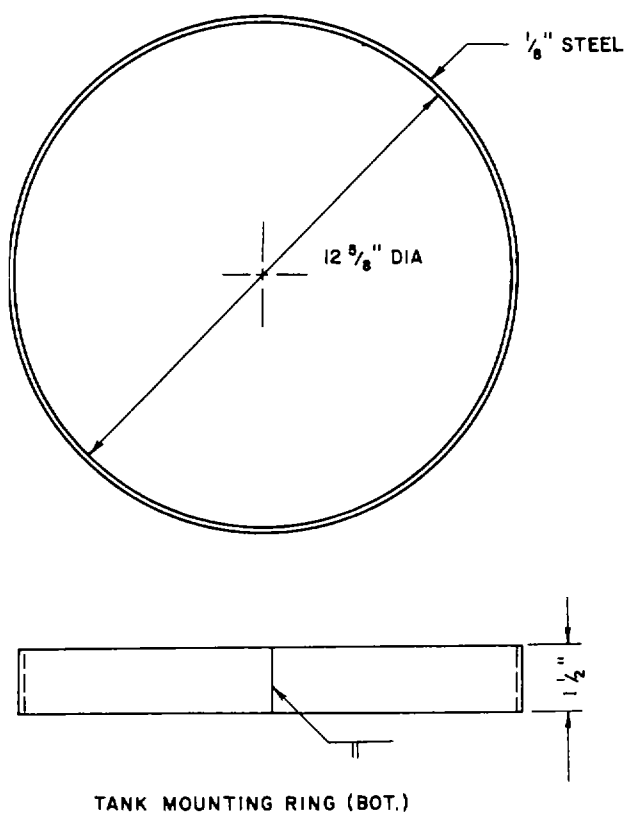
Tank mounting ring, bottom, 12 5/8 inch diameter.
